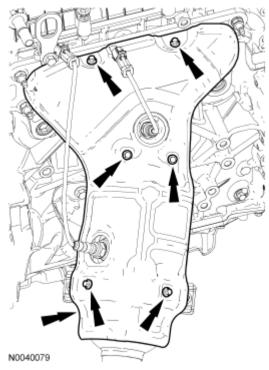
Locating Heat Shield Screws Courtesy of FORD MOTOR CO.
